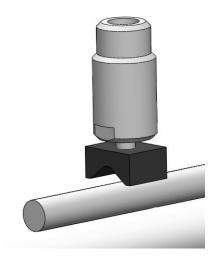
Pneumatic actuator for locking the rotation of the shaft.
